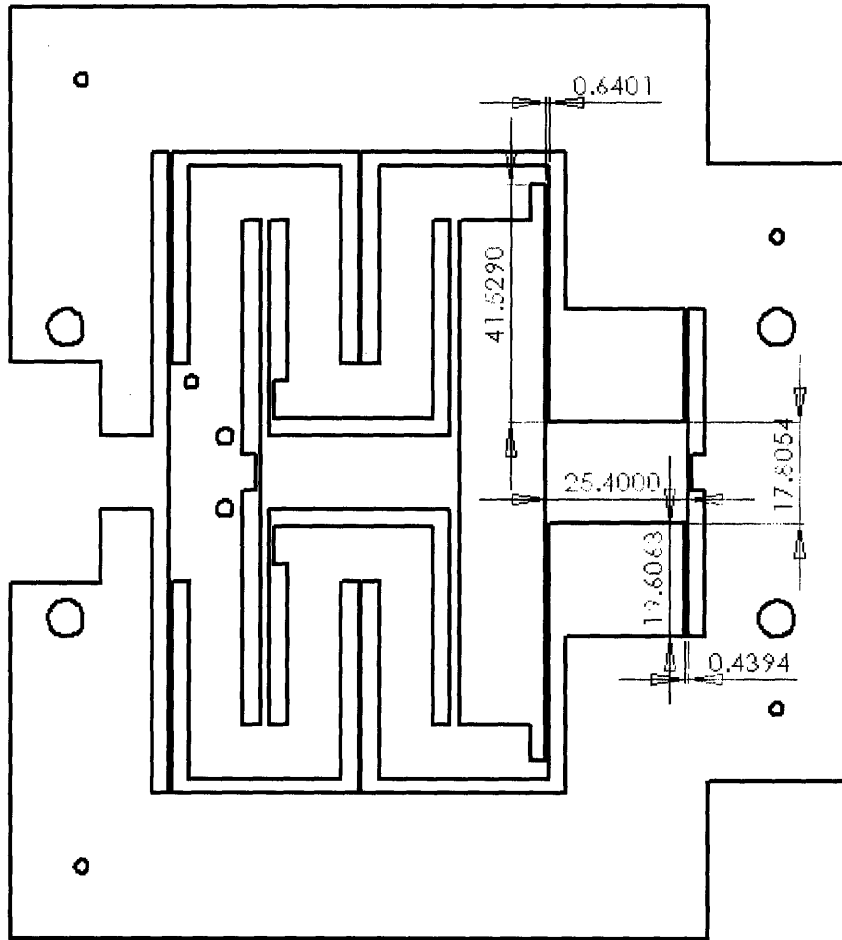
Dimensions of displacement shuttle, (3) and (4) flexures in mm
